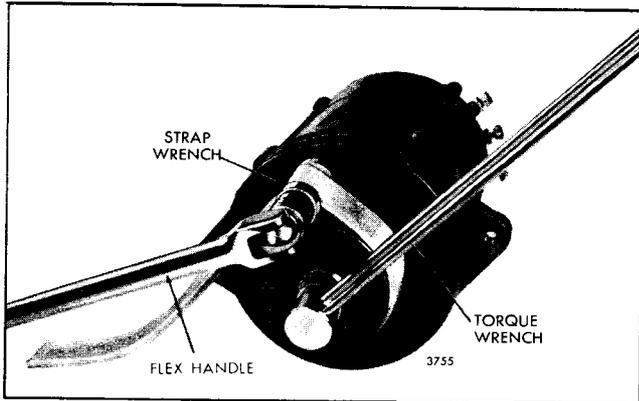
Tighten Generator or Alternator Pulley Retaining Nut
